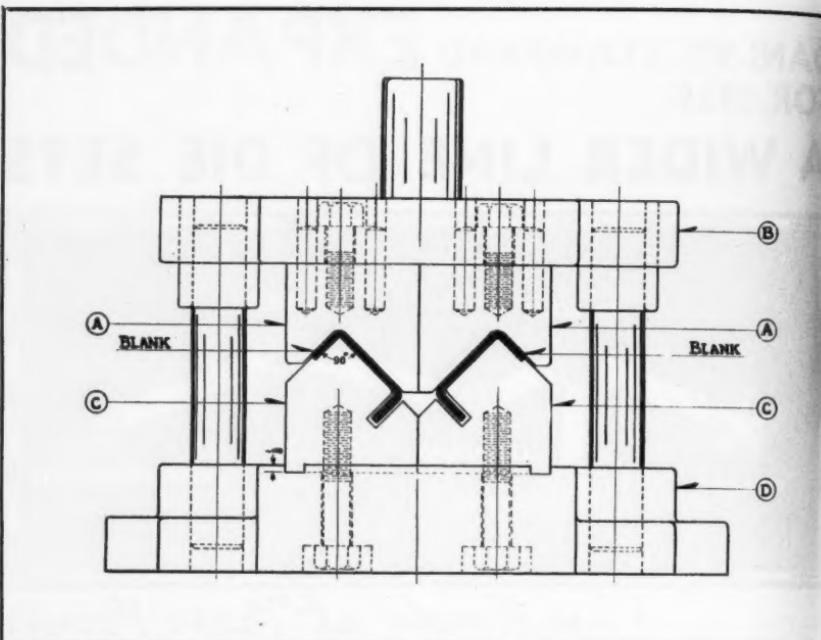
Design of double sizing die used to finish the blank shown in Fig. 4.
